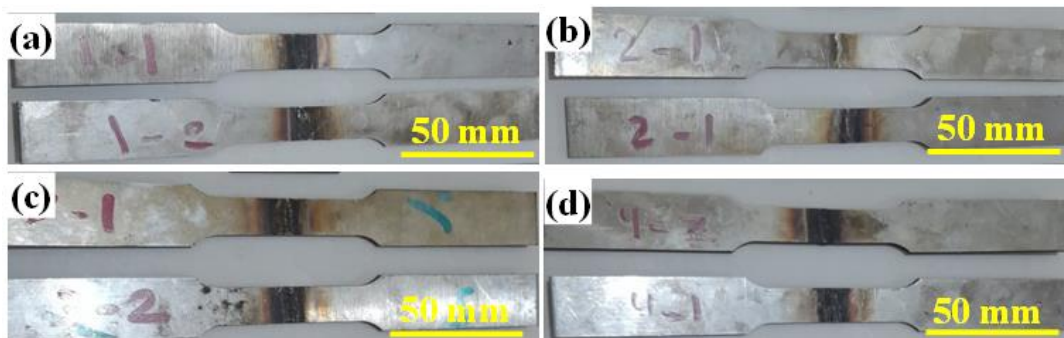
The wire cut tensile test specimens for stainless steels 304 and 304L welded joints at (a) ER309 and 70 A (b) ER309 and 80 A (c) ER304 and 70 A (d) ER304 and 80 A
